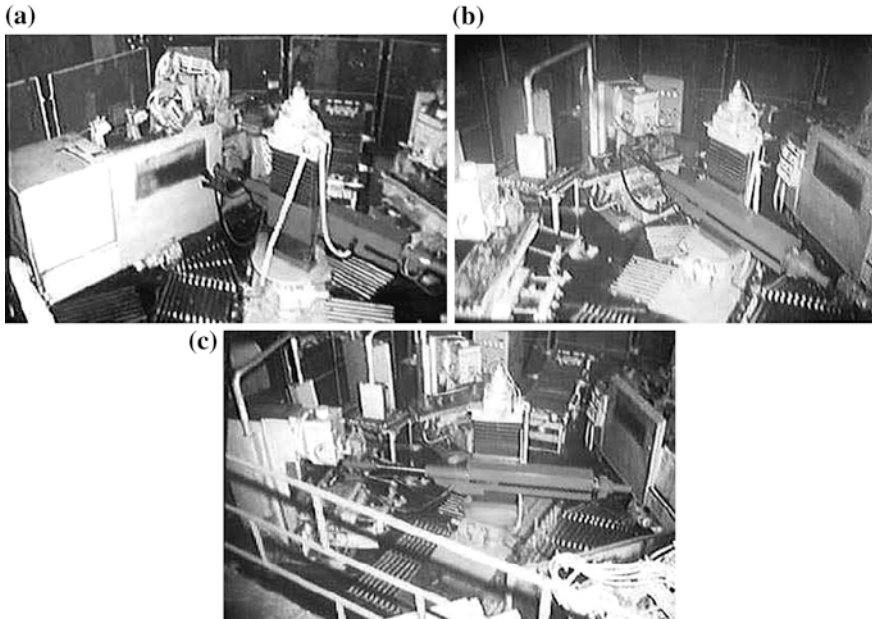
Manufacturing cell for machining the shafts. a robot REMT-1, feeding a part to the copying lathe; b robot REMT-1, feeding a machined shaft to the first milling machine; c robot REMT-1, transferring a finished shaft to the cell evacuation device
